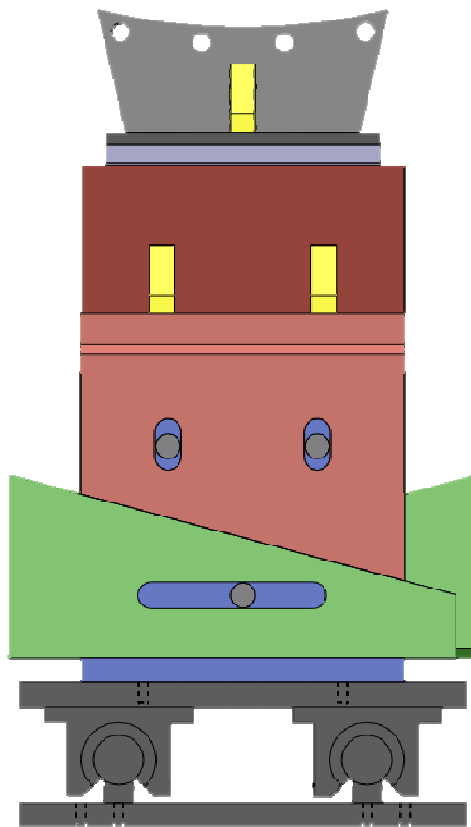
Side view of the final aft-mount design showing the alignment between the slots in the wedge and top plate compared to the holes in the base plate.
